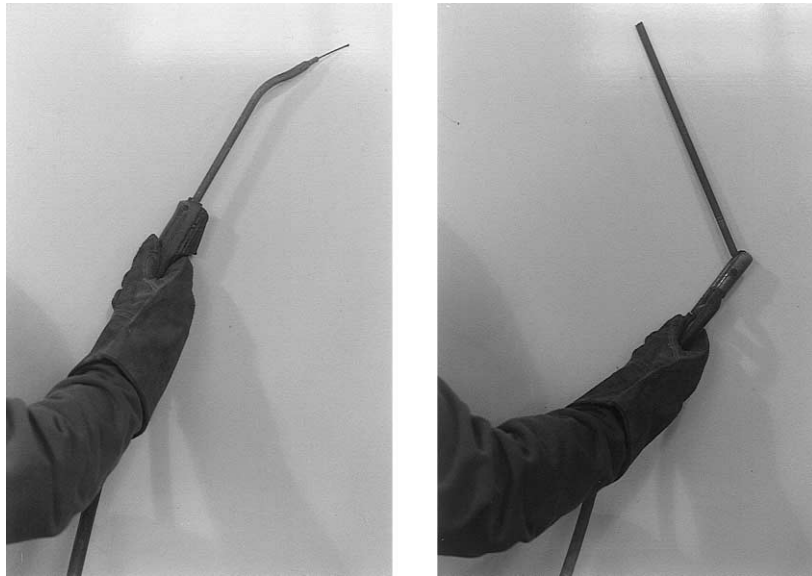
Welding processes. (Left) Flux-core arc welding (wire fed). (Right) Shielded metal arc welding (stick electrode).
